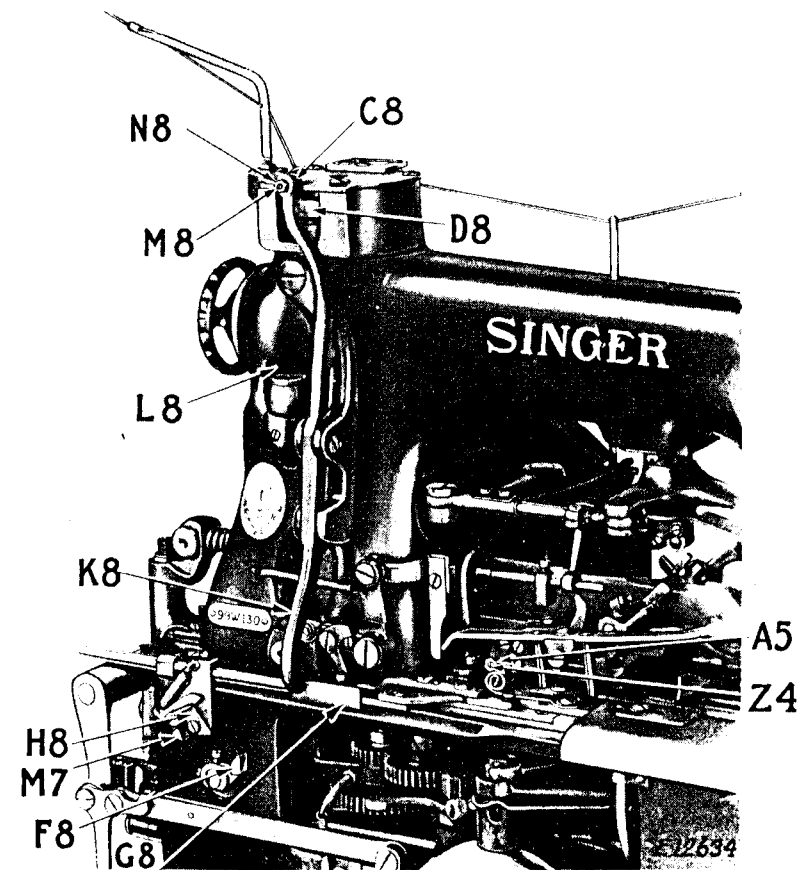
Adjustment of Automatic Needle Thread Tension Releaser
